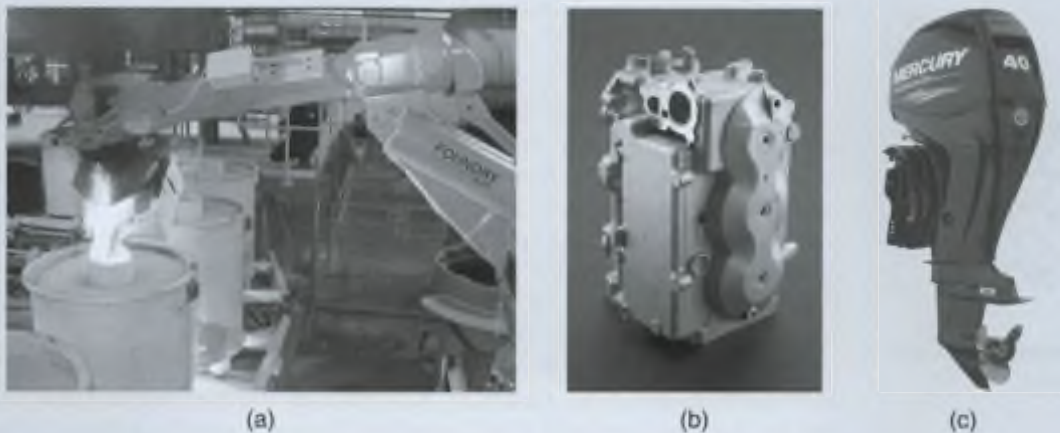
(a) Metal is poured into a mold for lost-foam casting of a 40-hp, three-cylinder marine engine; (b) finished engine block; and (c) completed outboard motor. *Source:* Mercury Marine.
